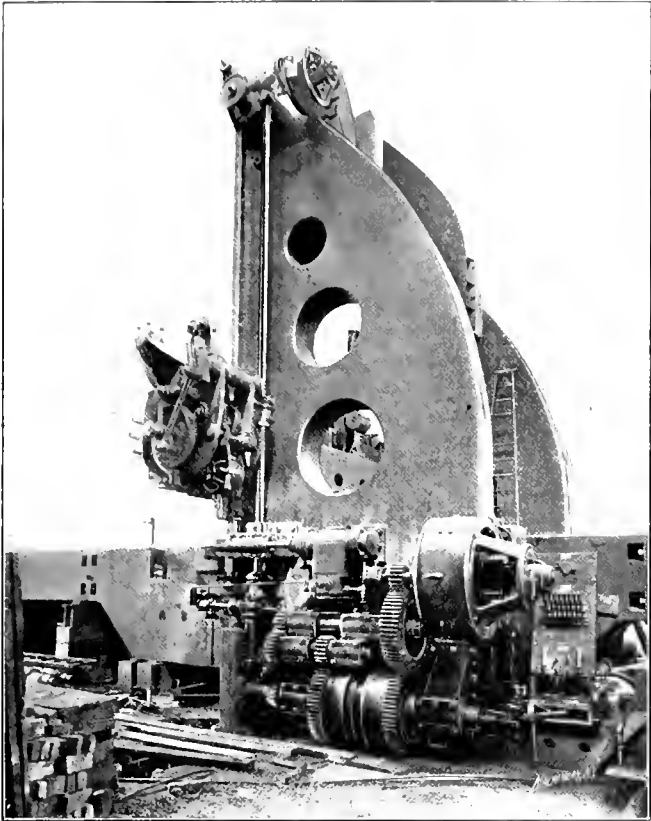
View showing the 100-horse-power Motor for the Main Drive.
